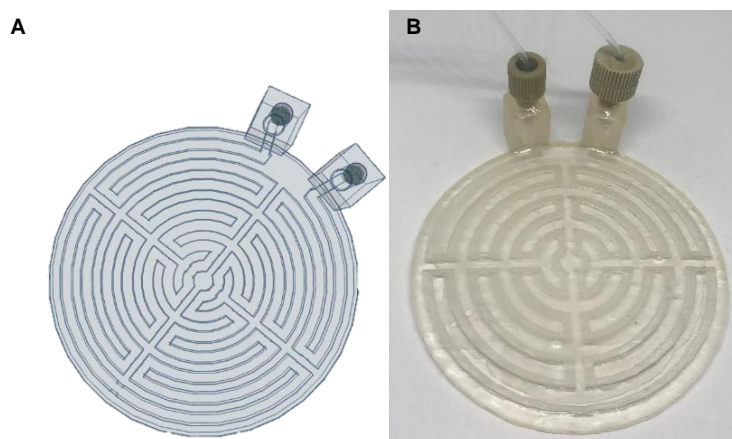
A) CAD drawing of circular hotplate reactor design 5; B) Printed circular hotplate reactor design 5 attached with PEEK ferrules.
